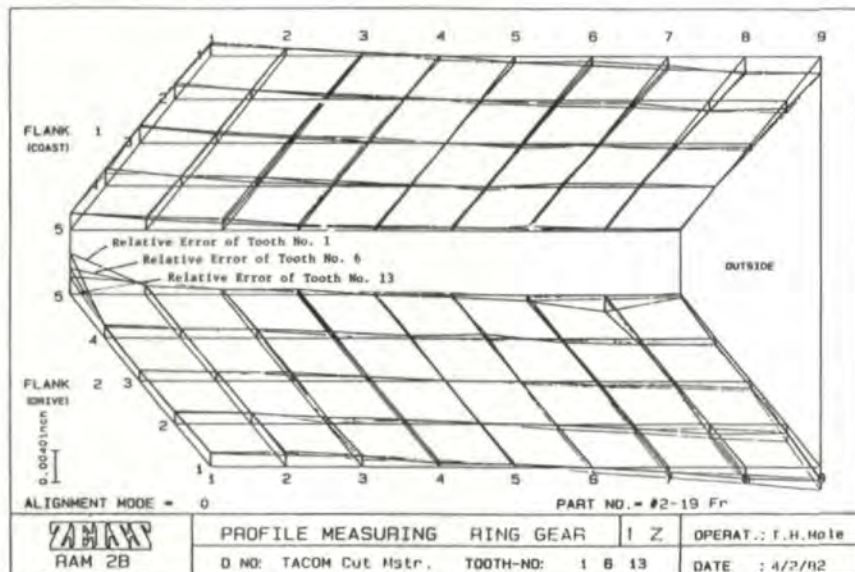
Zeiss gear tooth plots comparing the tooth form variation of a forged gear versus the cut master gear.
